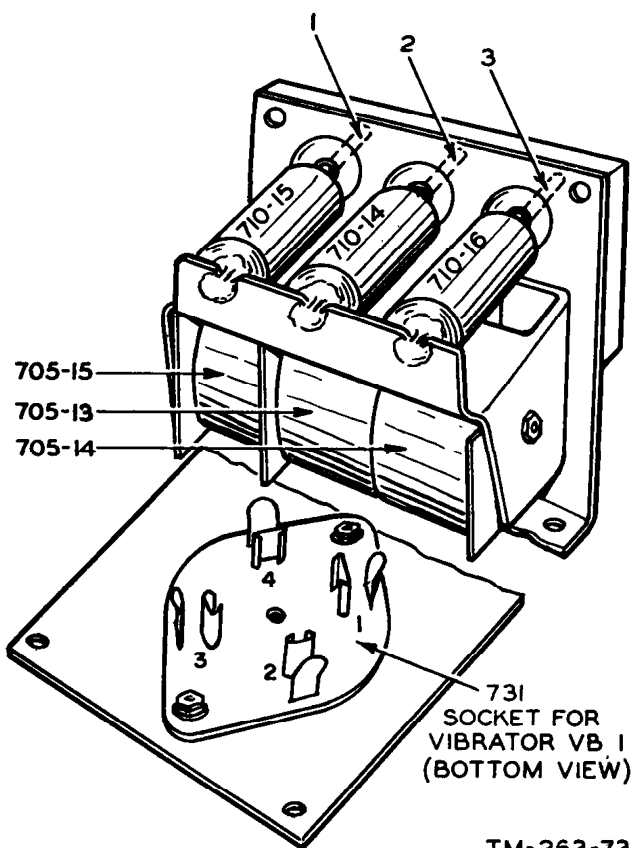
Vibrator Power Supply PE-237 (early models), top view for parts identification purposes.
